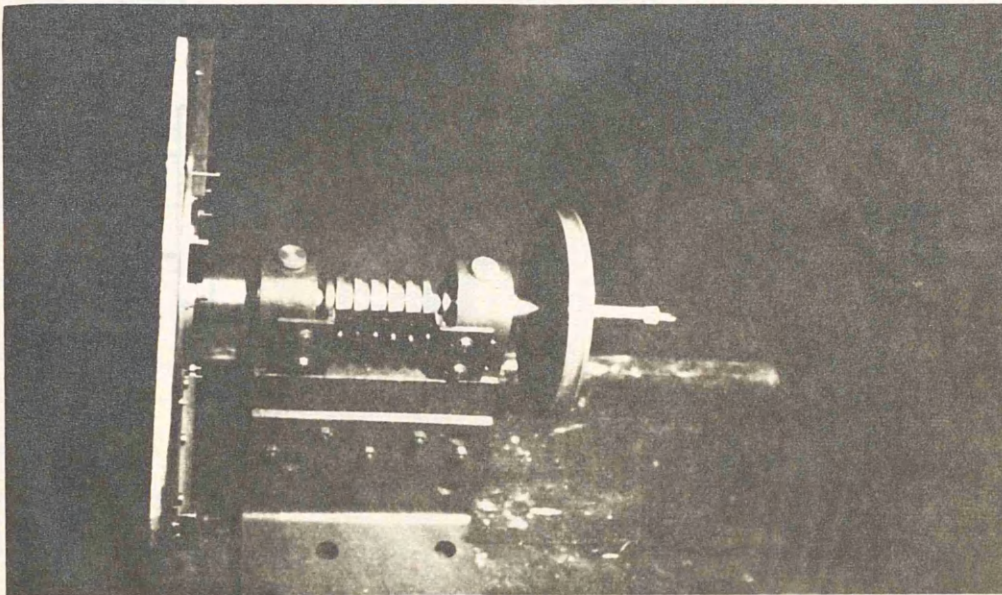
PHOTOGRAPH OF THE ROTATING ELEMENT.
